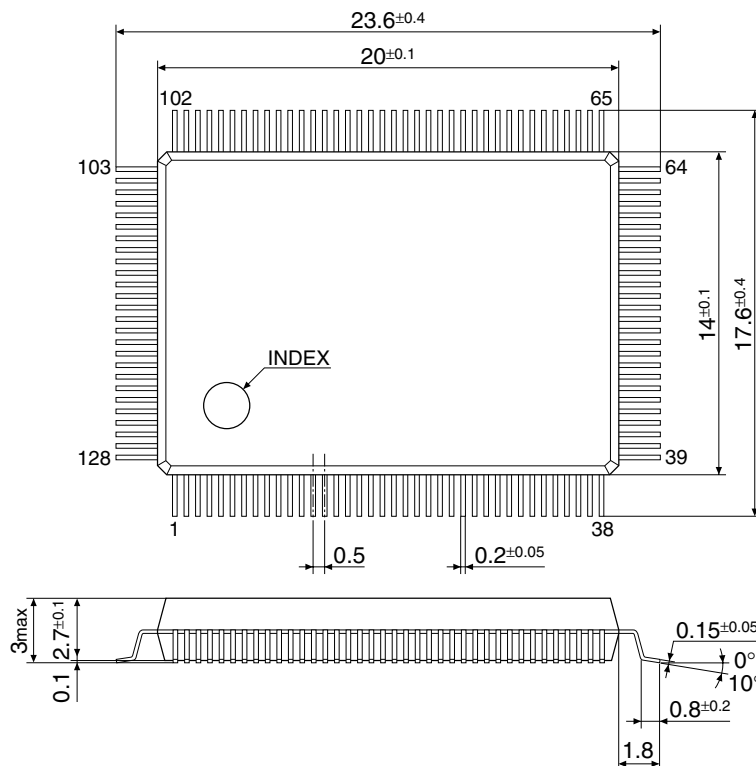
QFP5-128pin Package Dimensions
